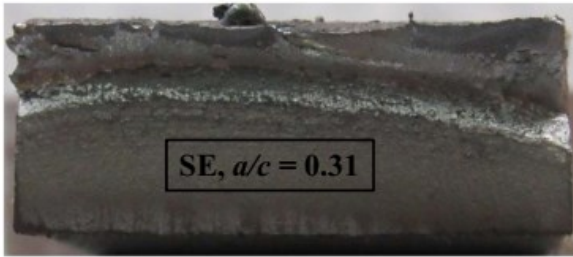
Fracture surfaces for as-welded 350W steel specimens under VA2 loading
